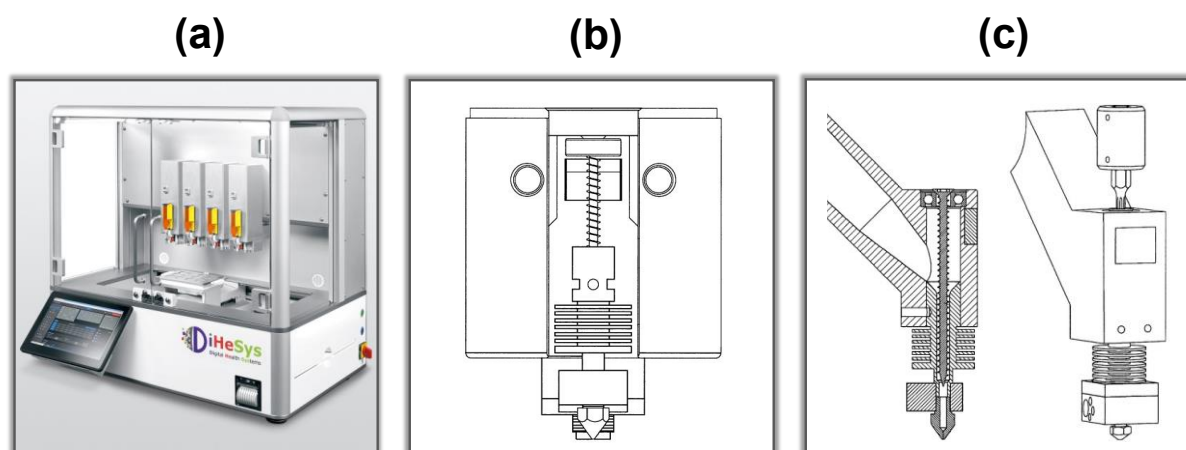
Hardware setup of the *FlexDose™* 3D printer consisting of the: (a) front view of the printer [94], patented technical drawing of the (b) printhead and (c) exchangeable extrusion channel [98].
